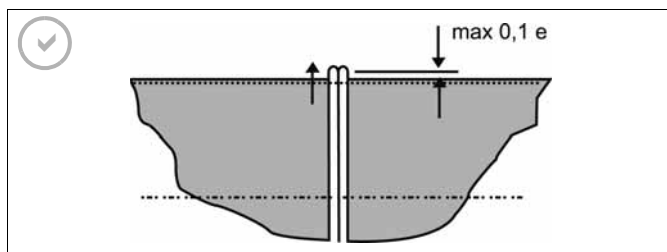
Butt-welding with acceptable wall misalignment
